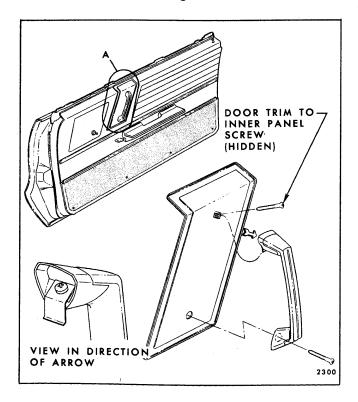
Door Pull Handle Removal - 49487 Style with Standard Trim
